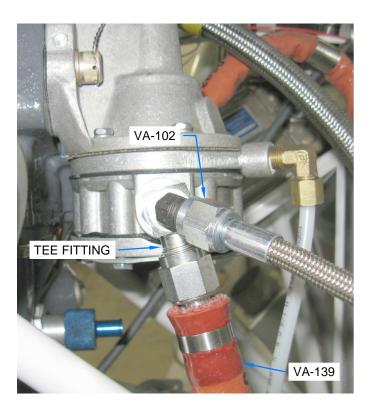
HOSES AT FUEL PUMP (TAIL DRAGGER - LEFT SIDE VIEW)
